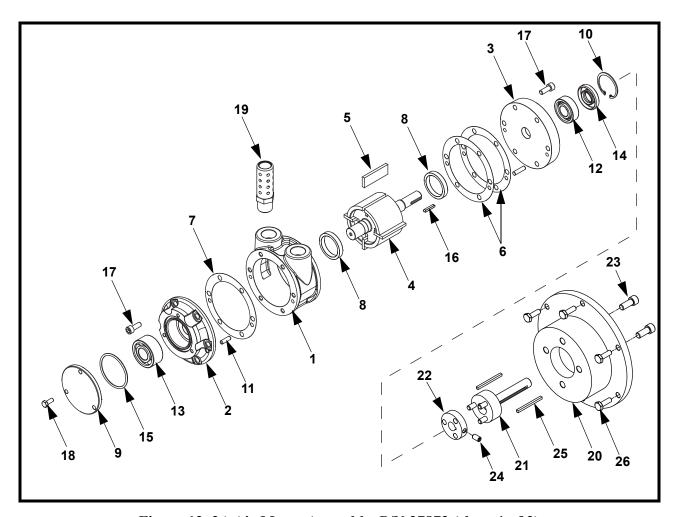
2A Air Motor Assembly, P/N 27873 (sheet 1 of 2)
